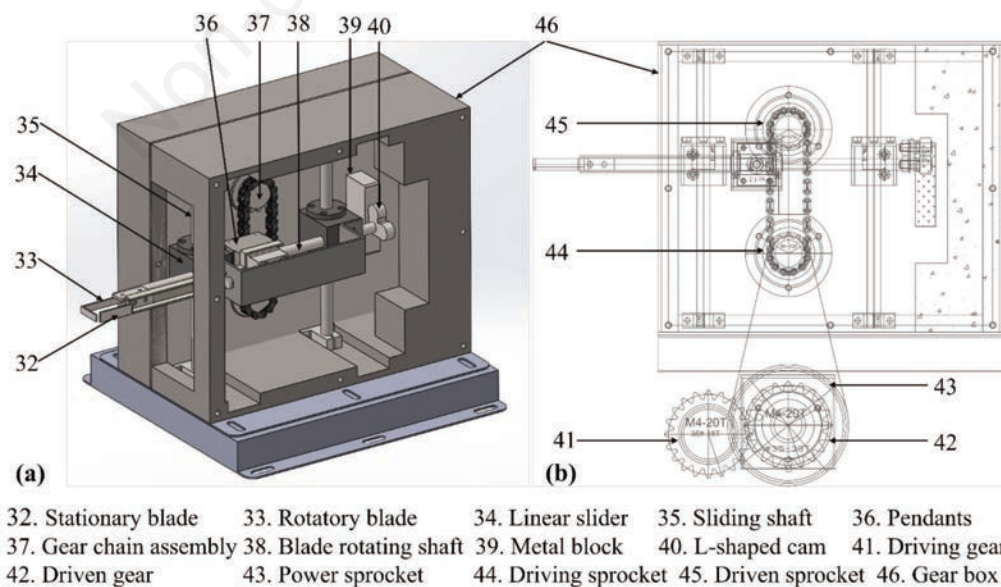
Cutting mechanism of the seedling plug-tray cutting mechanism; (a) assembly view of the cutting mechanisms and (b) detailed CAD design of the mechanisms.
